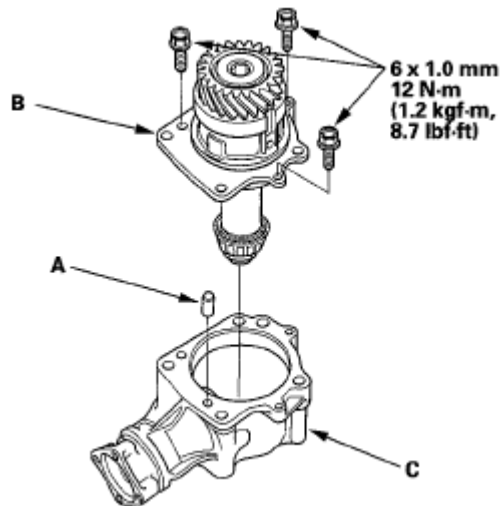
Identifying Dowel Pin, Transfer Holder Assembly And Transfer Housing With Torque Specification
